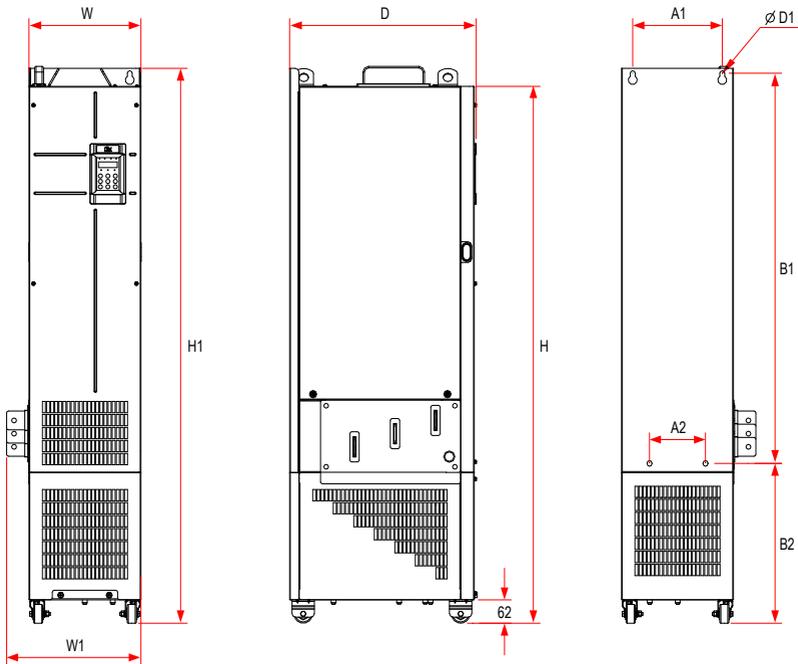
Exterior dimensions and mounting dimensions of 200-450 kW AC drive models (with the reactor base)
